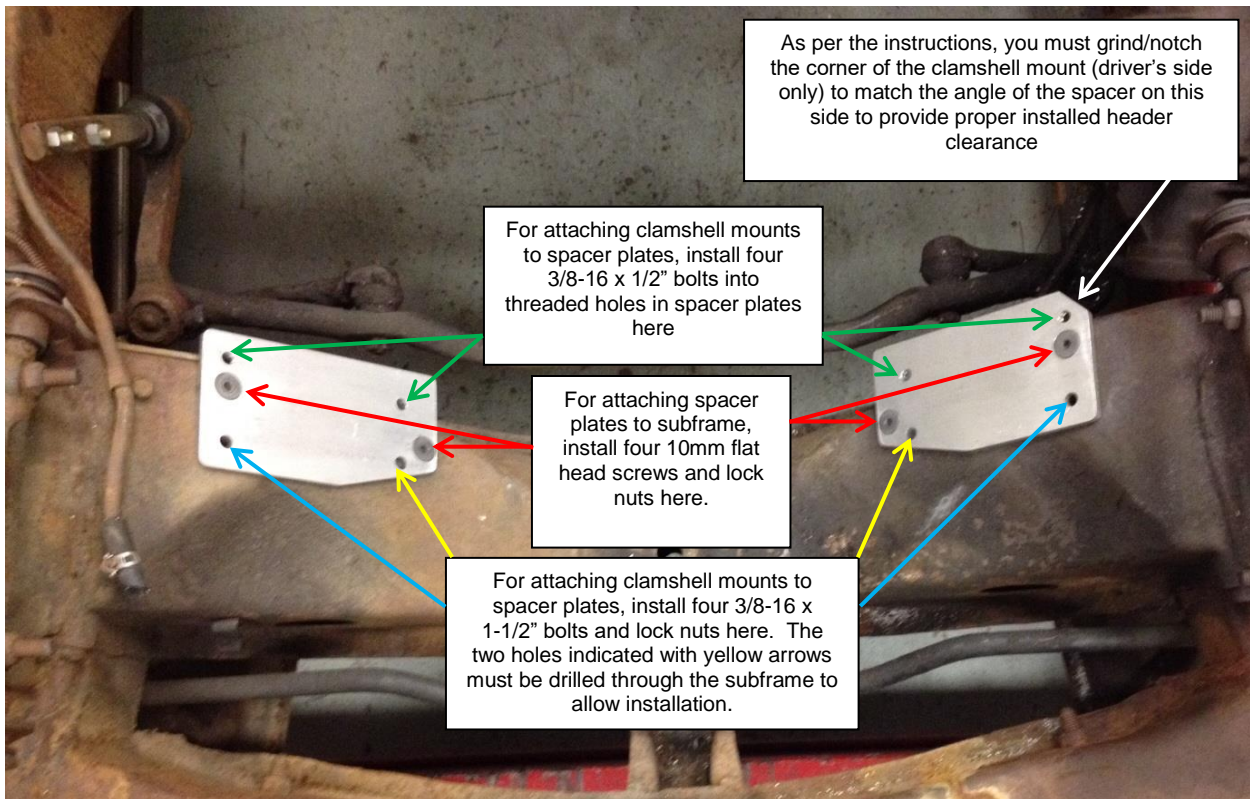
Adapter Plate/Clamshell Fastener Schedule
